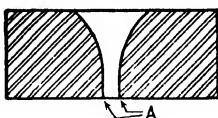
Longitudinal section of a cold drawing die. Stresses set up in heat treatment and in service concentrated at point "A" so a fillet should have been used to avoid chance of spalling at corners.
